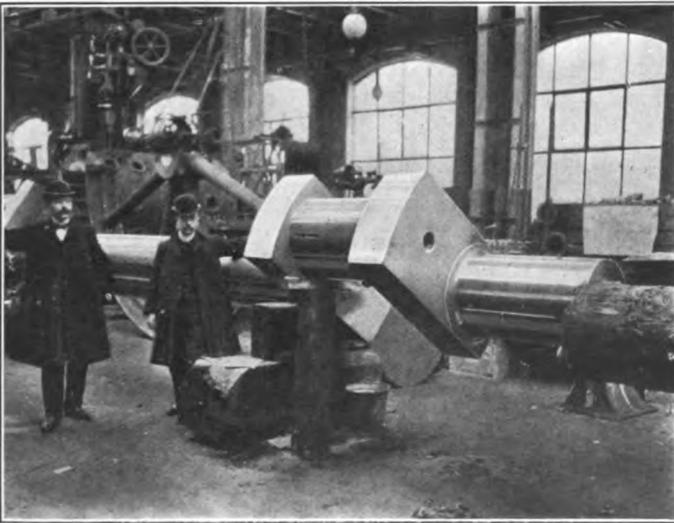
Crank Shaft of 3,000 H.P. Nürnberg Engine.
